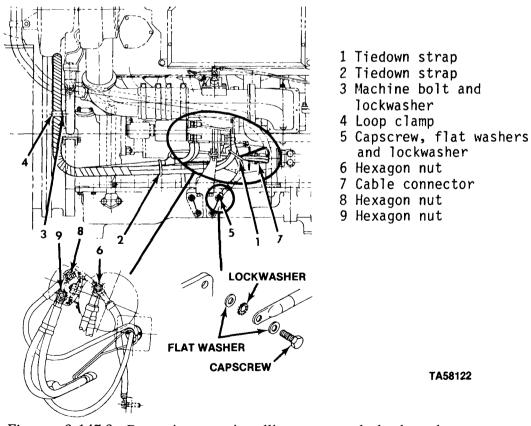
Removing or installing starter 1 lead and wiring harness, Model AVPS-1790-2DR
